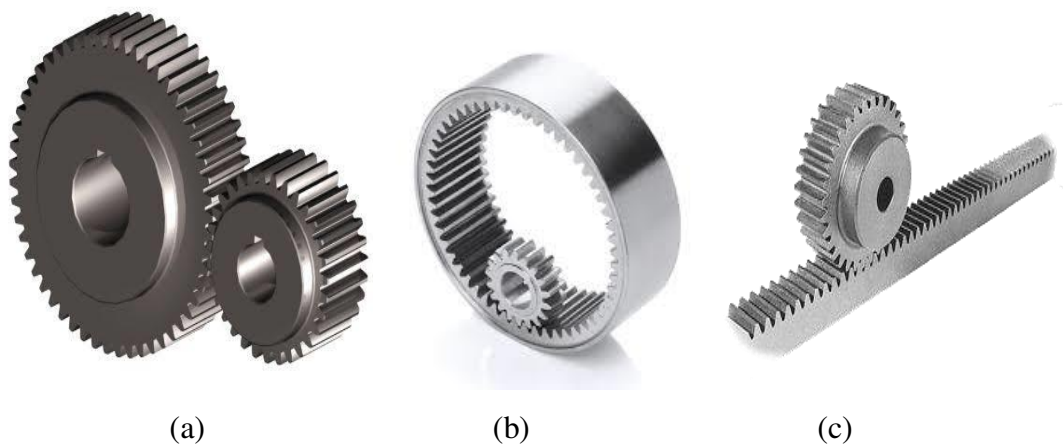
Types of spur gear (a) external spur gear (b) internal spur gear (c) rack and pinion gears
